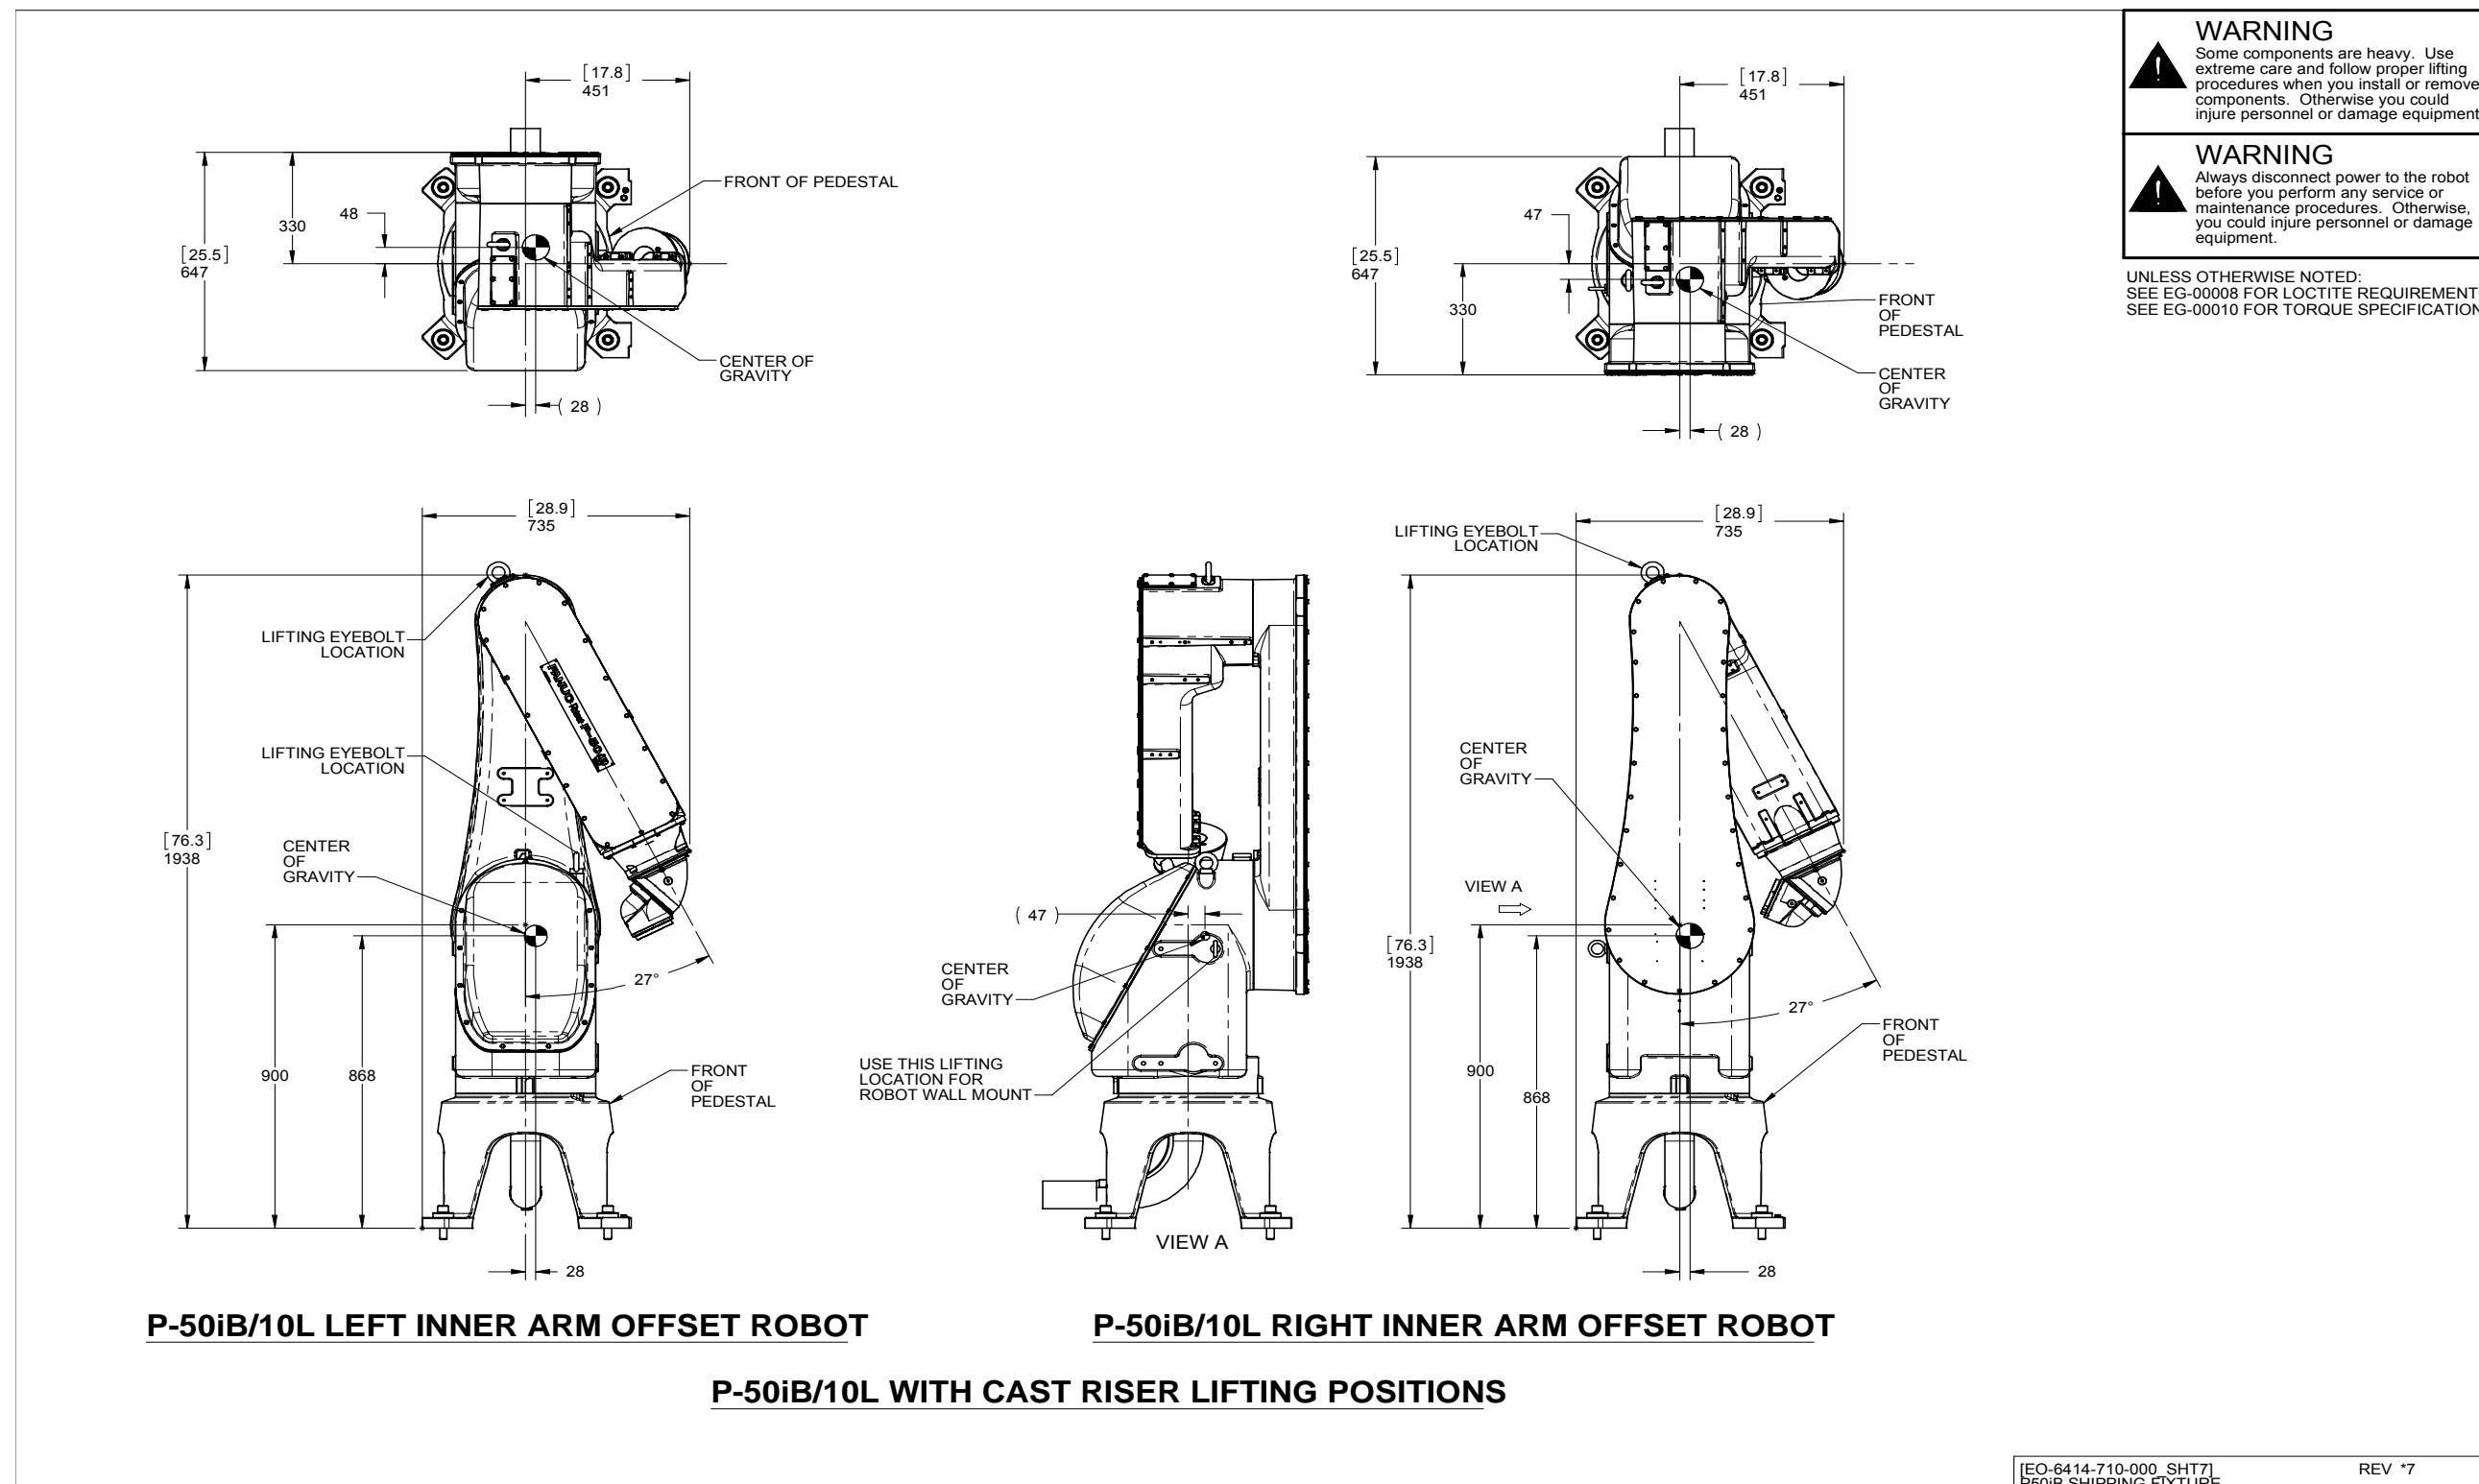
EO-6414-710-000 SHT7, P50iB SHIPPING FIXTURE
